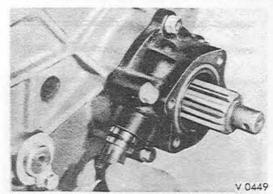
Removing the speedometer driven gear from the speedometer housing.
